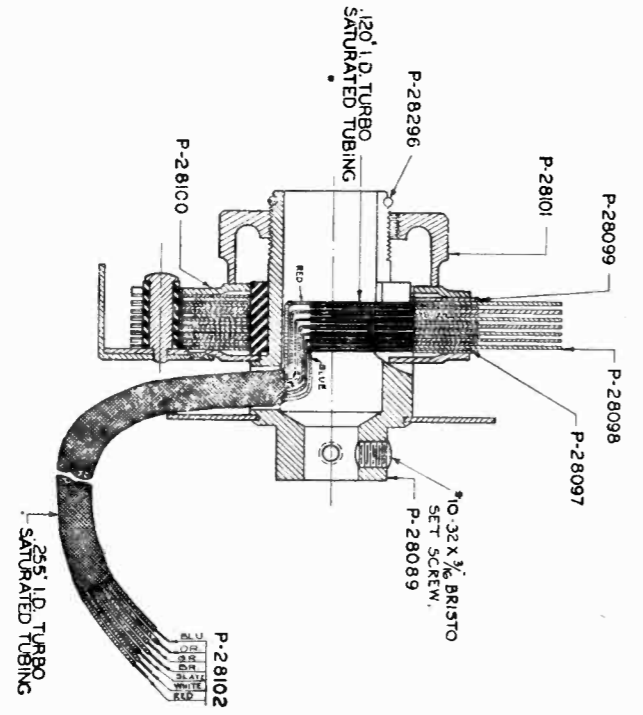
Section View of Flash Tuner Contactors Assembly.
